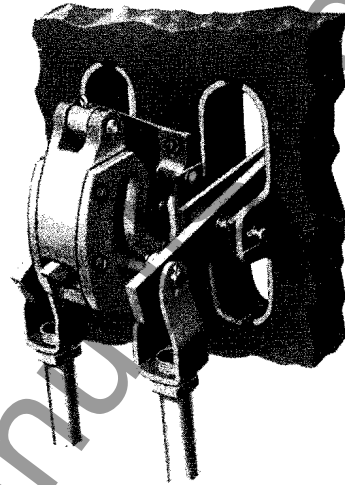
VIEW OF STARTING SIDE JUST AS STARTING HANDLE IS REACHING ITS OPEN POSITION
